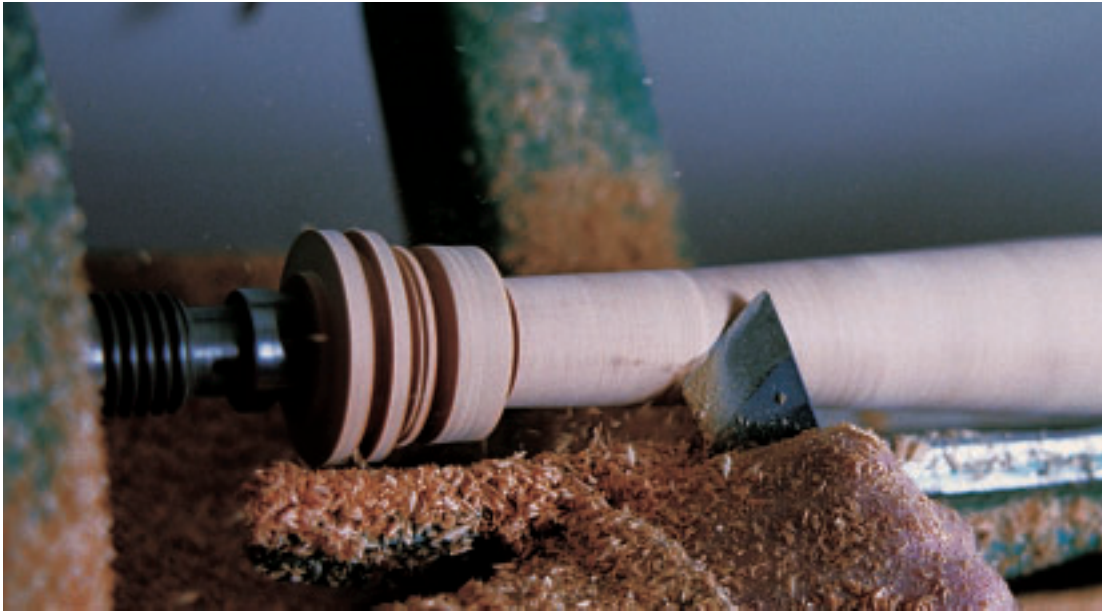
Photo B: After roughing out the cylinder below the joinery block, you have to cut the transition from square to round carefully. The gouge should be up on edge as you start the cut at the line.
